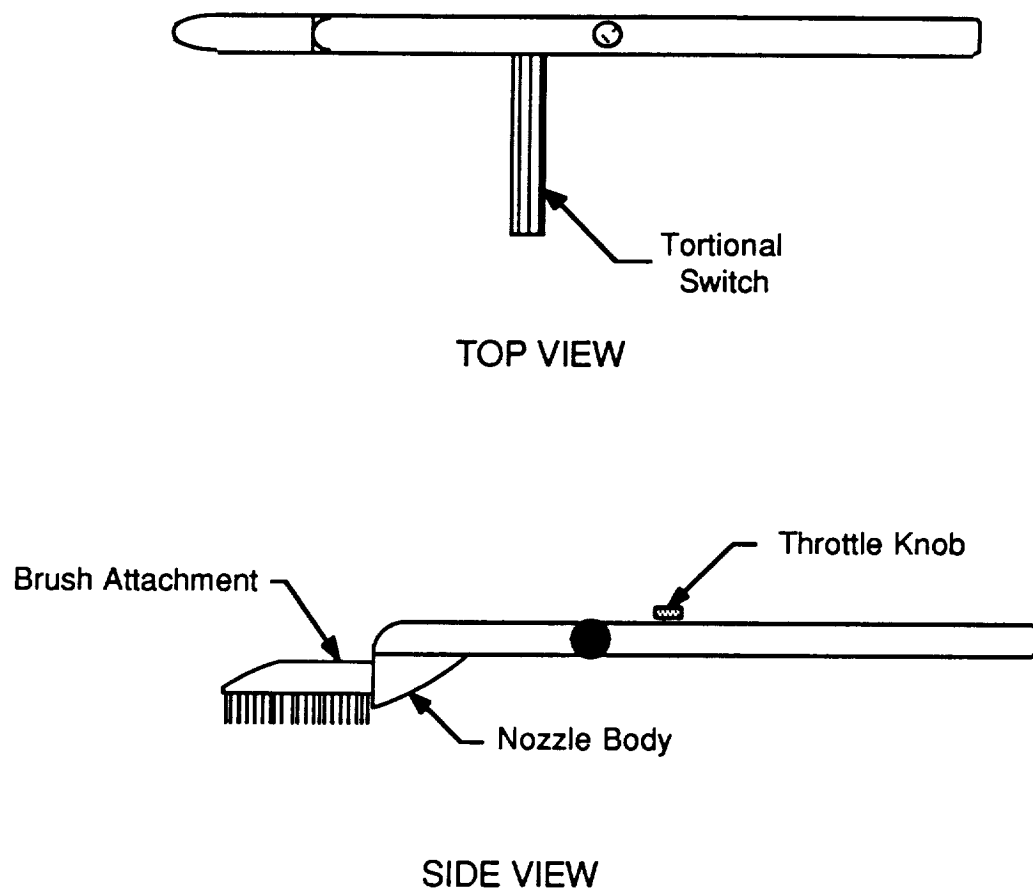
TOP AND SIDE VIEW OF THE DUSTING ATTACHMENT
